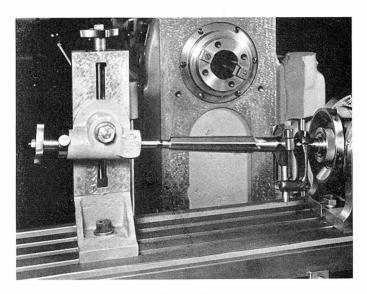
High Tailstock (Left) and Compensating Milling Machine Dog and Driver
